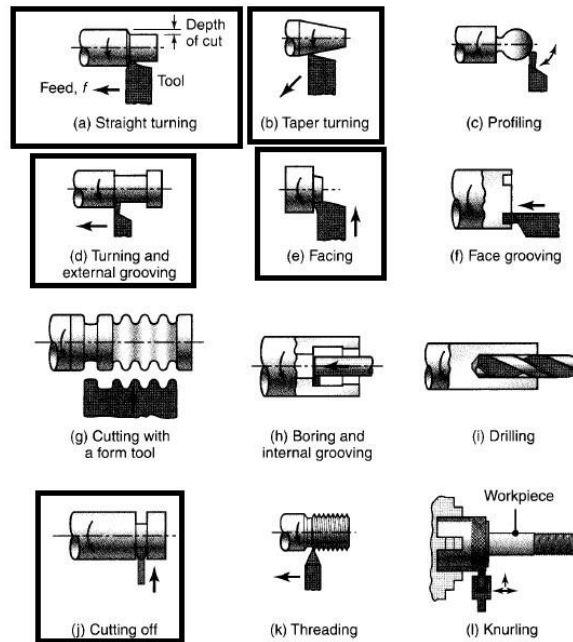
Various cutting operations that could be performed using a lathe, modified after Kalpakjian & Schmid (2006)
